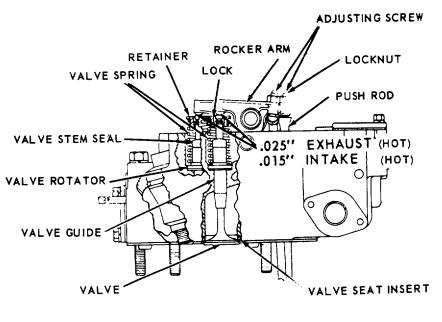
Valve (rocker arm) adjustment, model 687C-18-ES engine.
